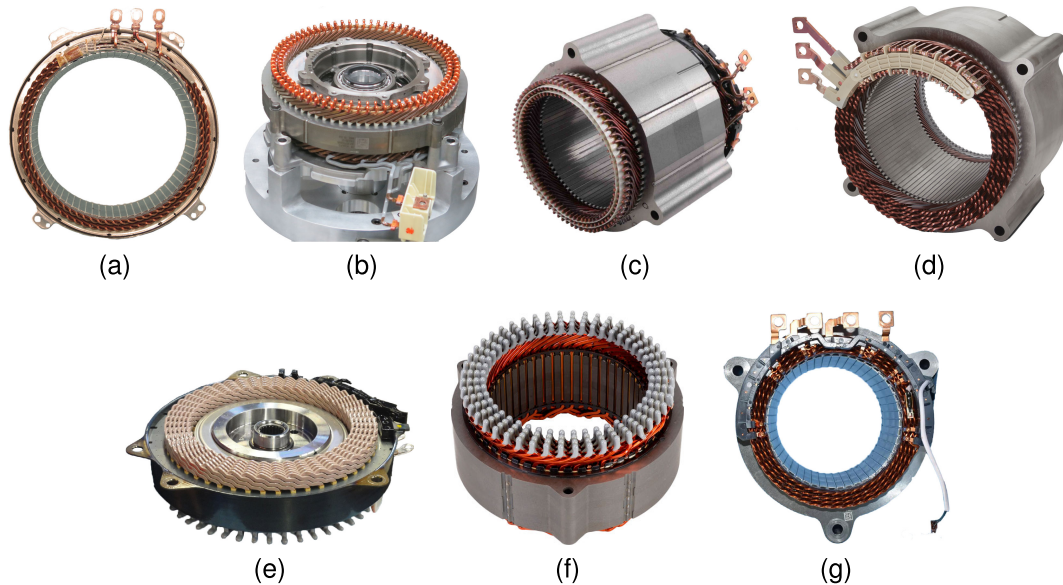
Modern hairpin-wound machines. (a) Chevy Volt Gen 1 stator GM. (b) Chevy Volt Gen. 2 motor GM. (c) Chevy Bolt stator GM. (d) GM Ultium rear motor stator GM. (e) Toyota Prius C P510 Transaxle motor. (f) Toyota P910 Transaxle stator. (g) Hyundai E-GMP front-motor stator.
